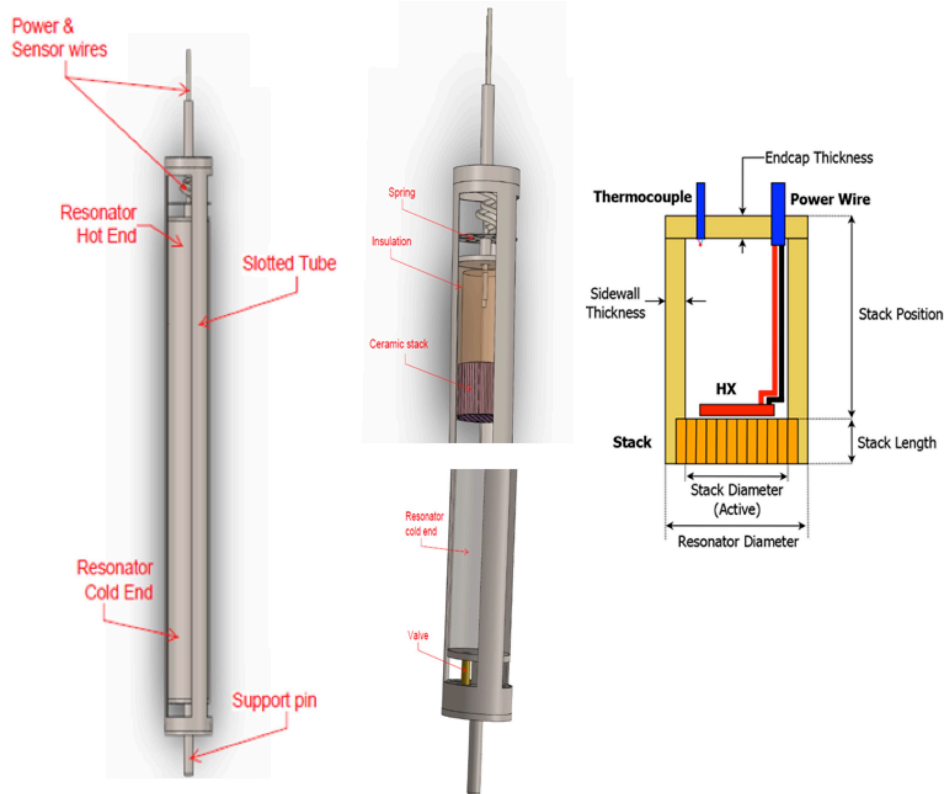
Sketches of the TAPS Assembly design: (left) resonator; (top-right) hot end; (bottom-right) cold end [1].
